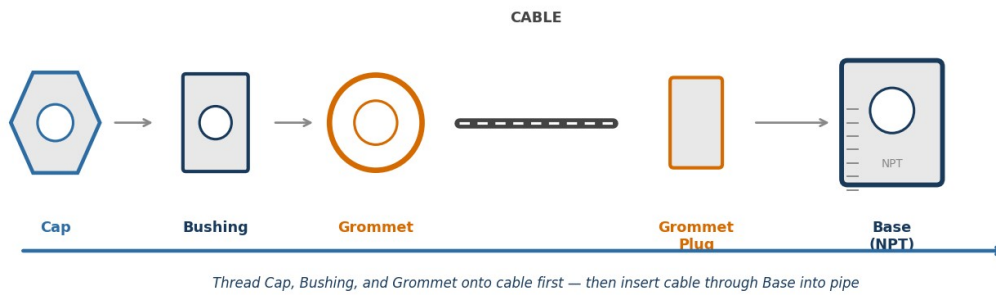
ILSR Compression Fitting components — thread Cap, Bushing, and Grommet onto cable before inserting
